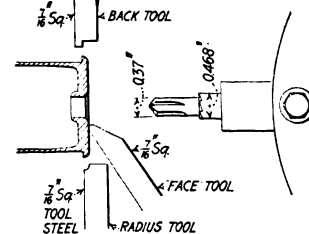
TOOL SET-UP FOR MACHINING FLANGE
